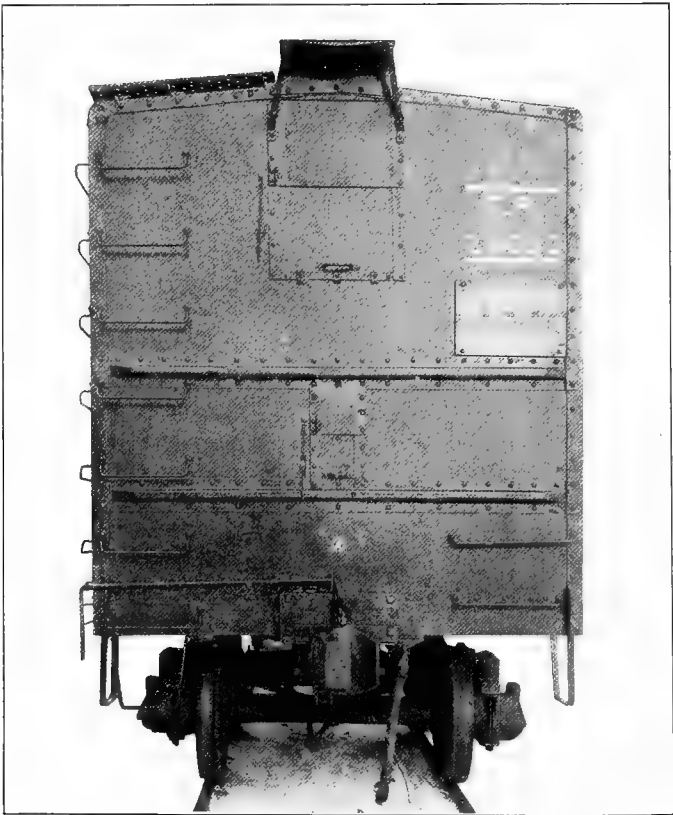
End Construction of Canadian Pacific Steel Box Car Shown in Fig. 2. Builder, Canadian Car & Foundry Company.
